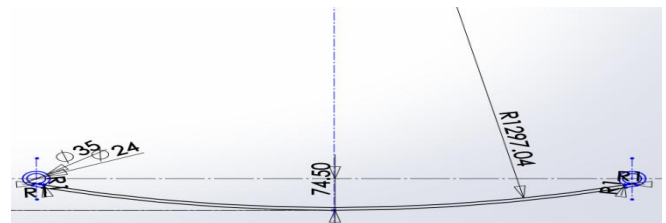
2D drawing of TATA ACE Master Leaf Spring
